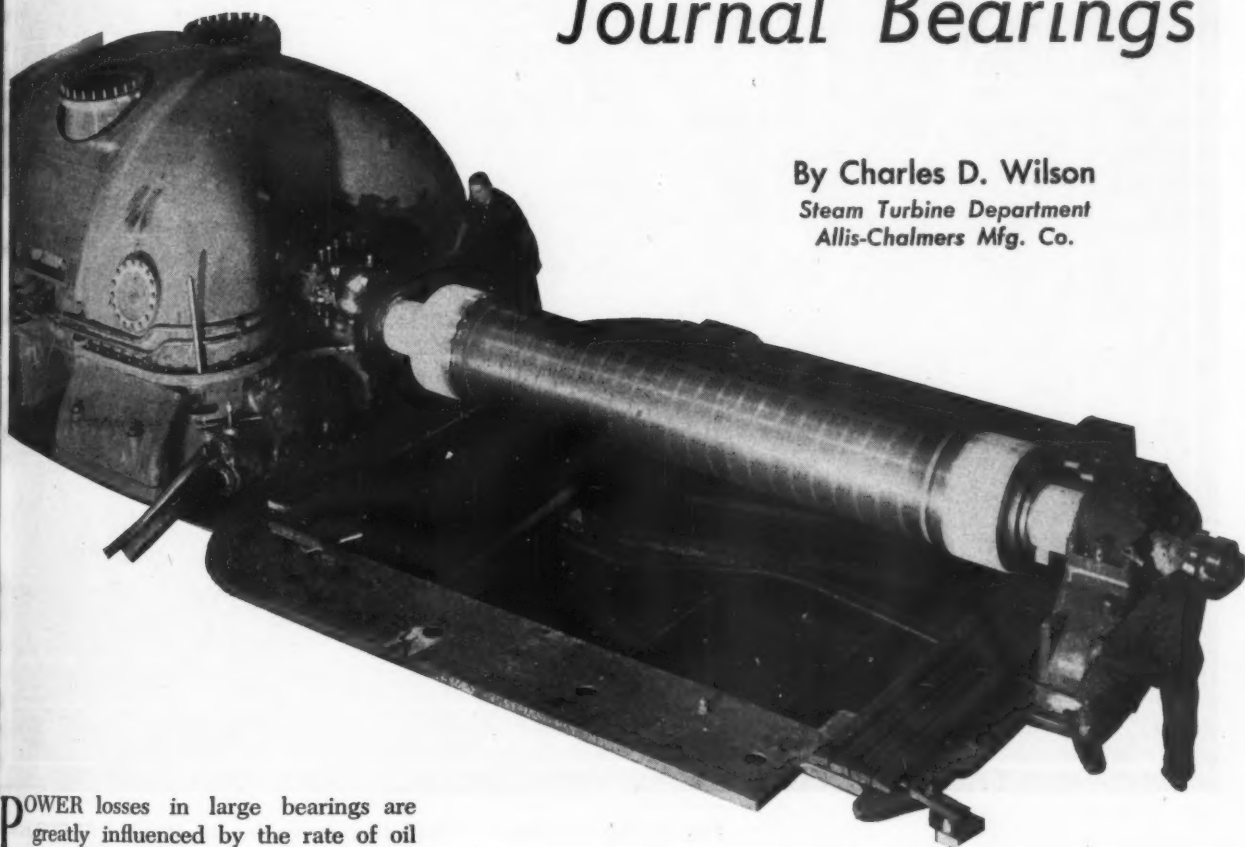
Test setup shows 35,000-kilowatt steam turbine unit running at 3600 revolutions per minute in 13½-inch diameter bearings with a surface speed over 144 mph
